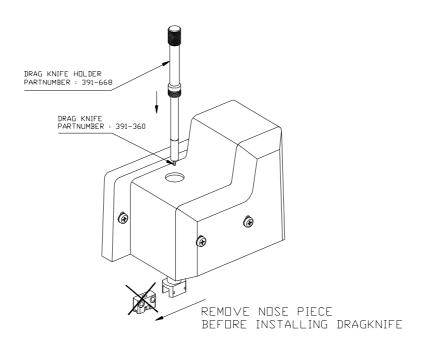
DRAG KNIFE HOLDER INSERTION
